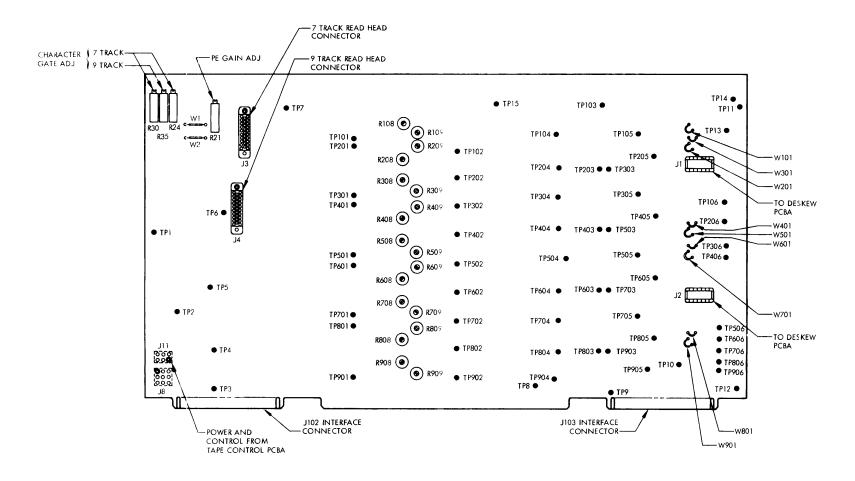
Data K PCBA, Connector and Test Point Placement
